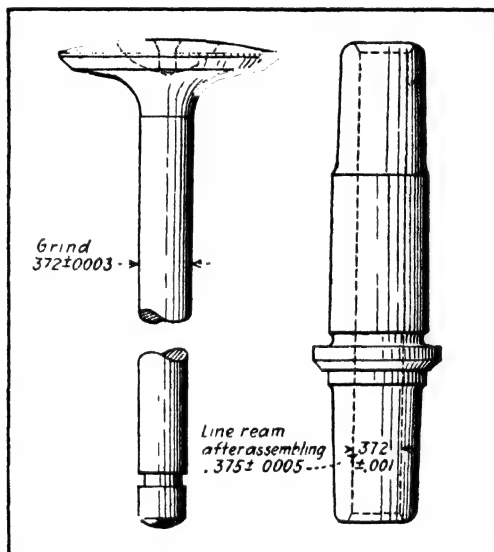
Drawing Showing Clearance Allowed Between Automotive Engine Valve Stem and Valve Stem Guide to Secure Free Action.
